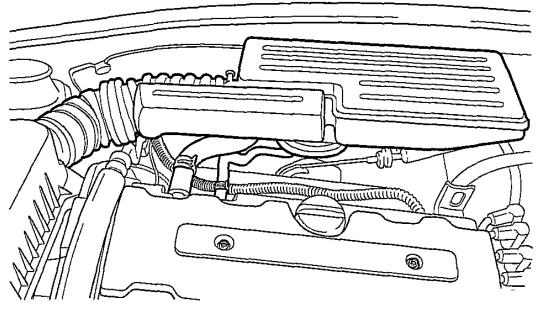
Removing The Air Cleaner Outlet Hose Courtesy of SUZUKI OF AMERICA CORP.
